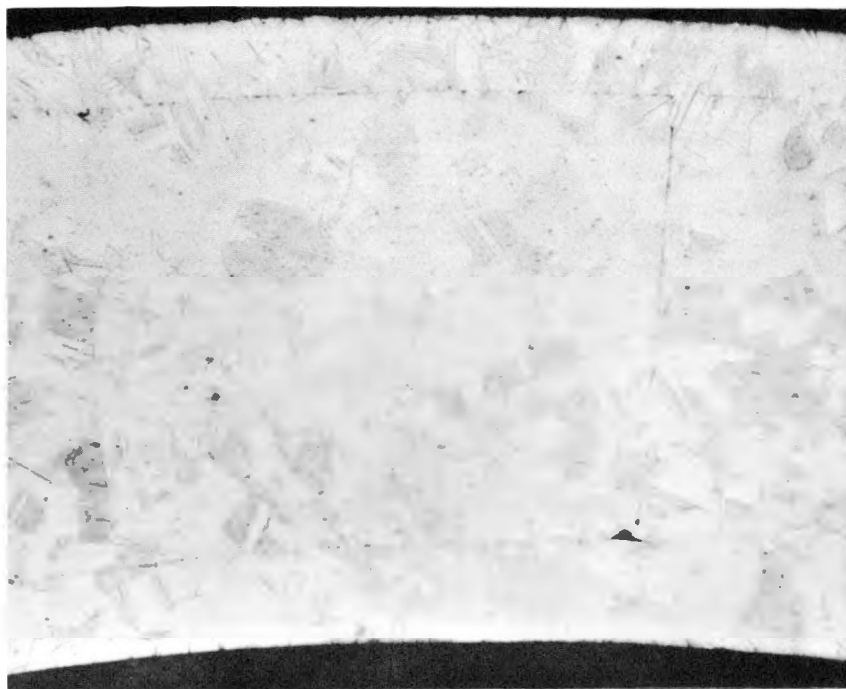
Typical Machined Butt Seam 10-Degree Angle
